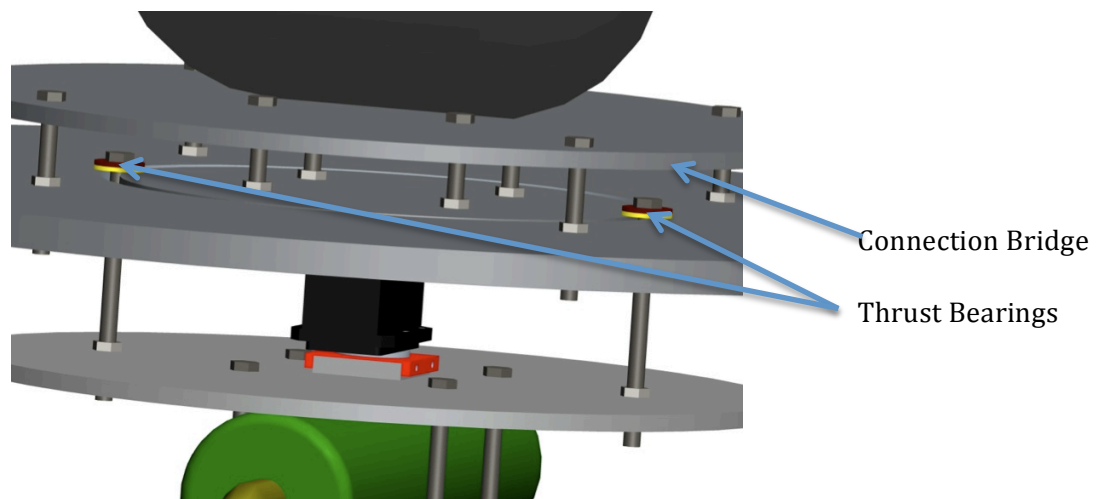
Zoom on Prototype Thrust Bearings and Bridge
